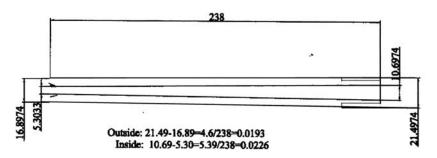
Diagram of the top-joint bore of a classical oboe. Drawing by the author.
